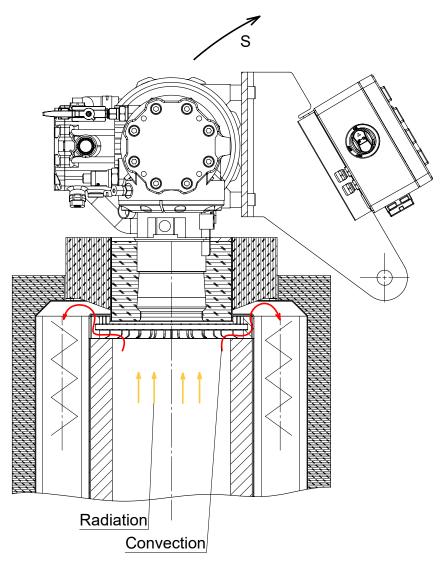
Example of the arrangement of the unit after the burn-out zone of a pellet furnace. The swivel device should allow the machine to be easily folded up for cleaning purposes.
